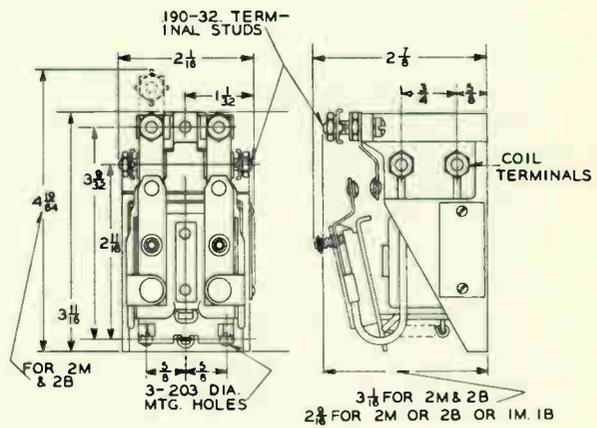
OUTLINE AND DRILLING PLAN FOR THE OPEN TYPE SG AUXILIARY RELAY.
